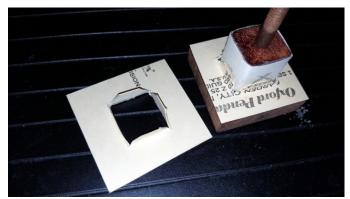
A flange being added to a cardboard coil bobbin. The mandrel/assembly fixture assures proper dimensions and shape.
